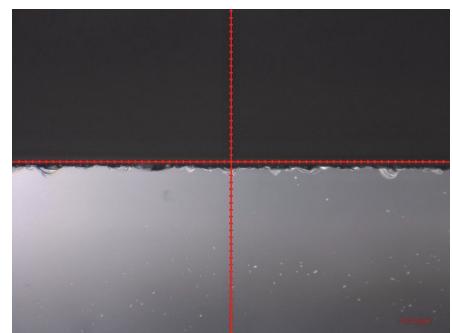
Cross-sectional image of wafer edge after dicing using Blade No.2
